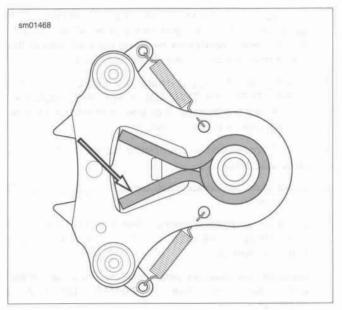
Incorrectly Installed Shifter Shaft Return Spring
